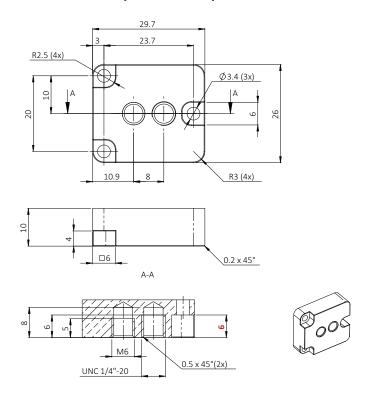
Allied Vision Mako U tripod adapter dimensions (Allied Vision product code 9222)
